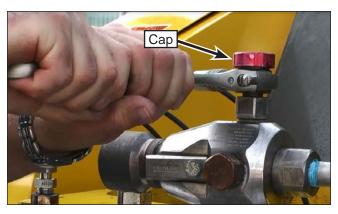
Housing/Cap Removal (15K Manifold Shown).
